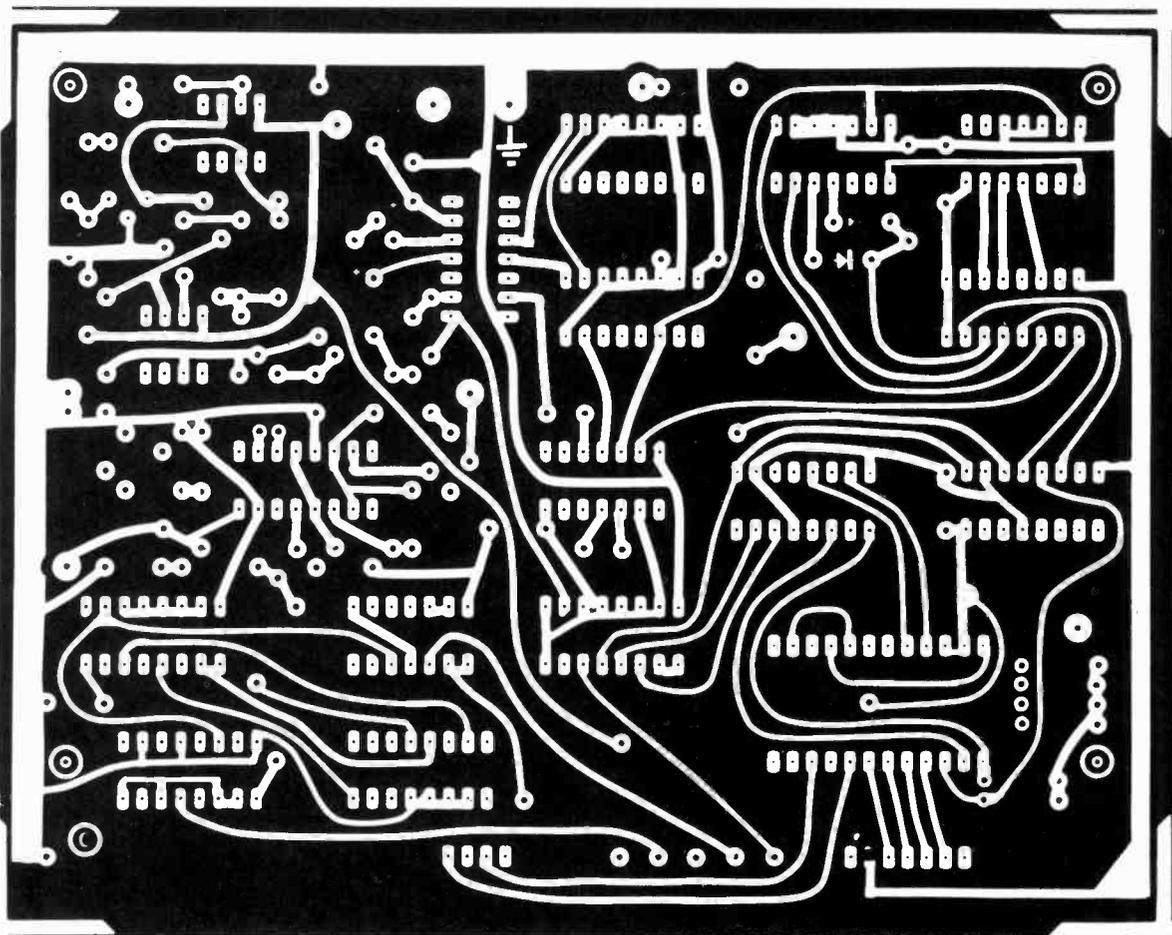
Actual-size etching and drilling guides for the double-sided main printed circuit board.
